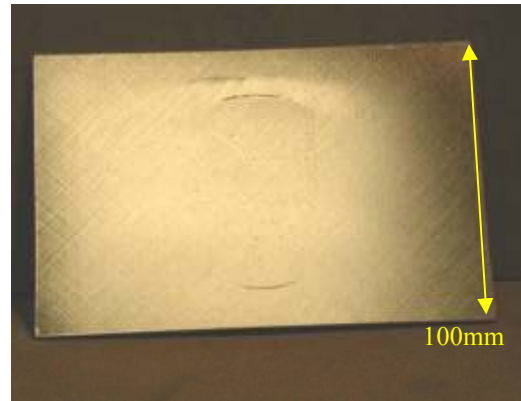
30J / Ø70 mm flat cylinder impact on 17ply unpainted laminate produced two surface flaw areas with deeper (0.24 mm), less complete circular shaped depressions
